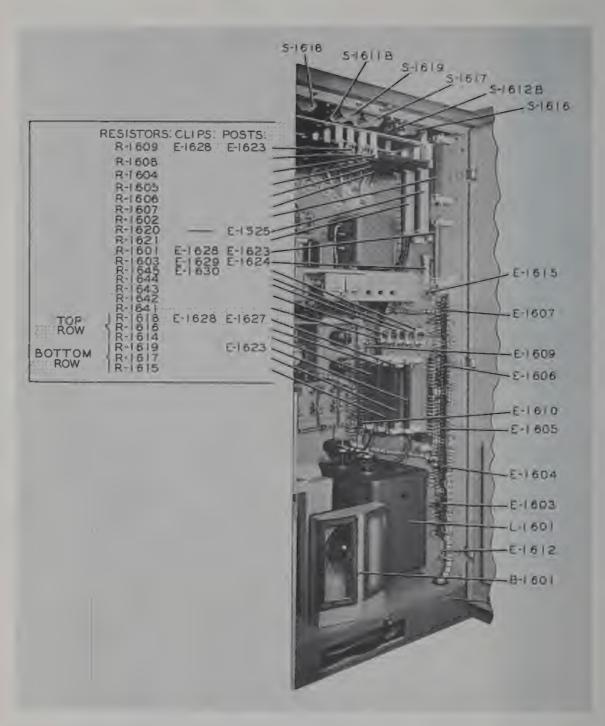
Power Supply Assembly PP-1089/FRT-22, Left-Side Cabinet Wall, Rear View.
